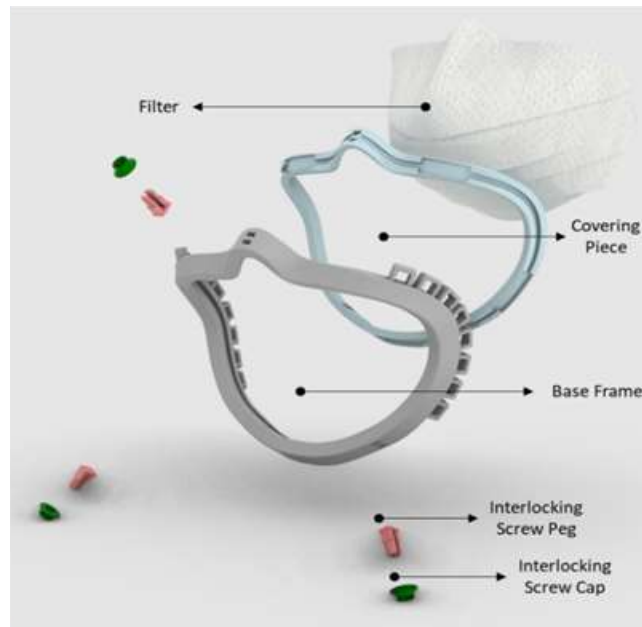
Final digital prototype: Base Frame, Covering Piece, Interlocking Screw Sets, and Filter.
